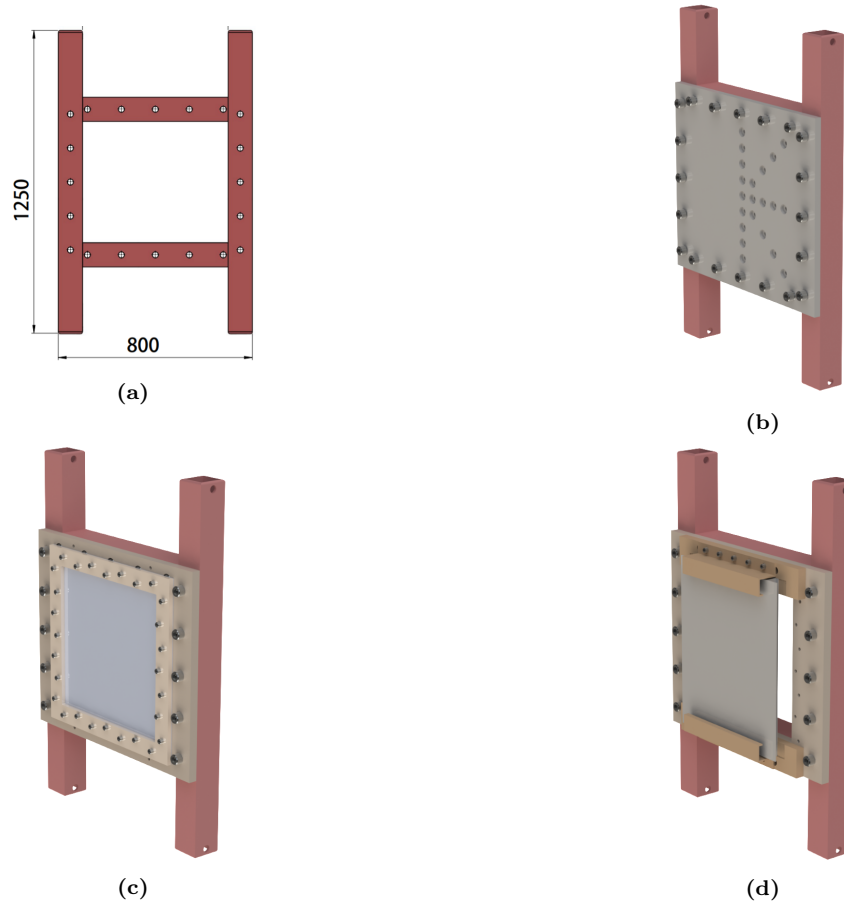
Dimensions of the base frame are shown in (a) and the three configurations of the setup: rigid plate, plate and stiffened plate are illustrated in (b), (c) and (d), respectively.
